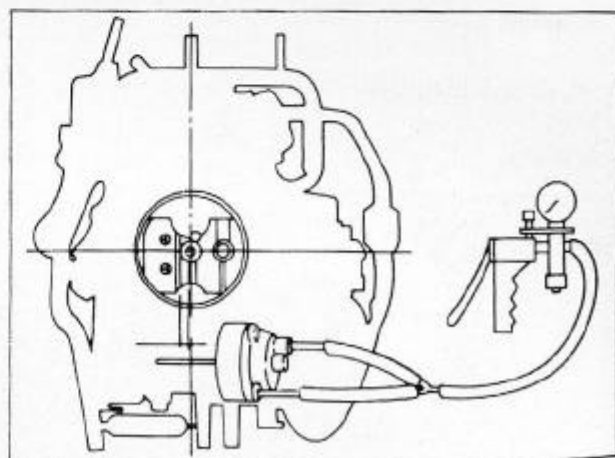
D — 31 CHECKING CHOKE OPENER(1ST STEP)
